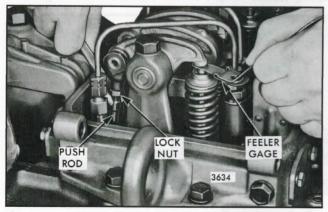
Adjusting Valve Clearance (Two Valve Head)
